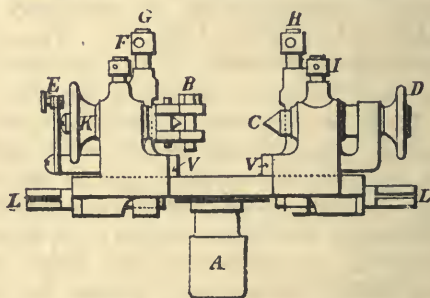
SIDE VIEW OF COMBINATION CHUCK.
